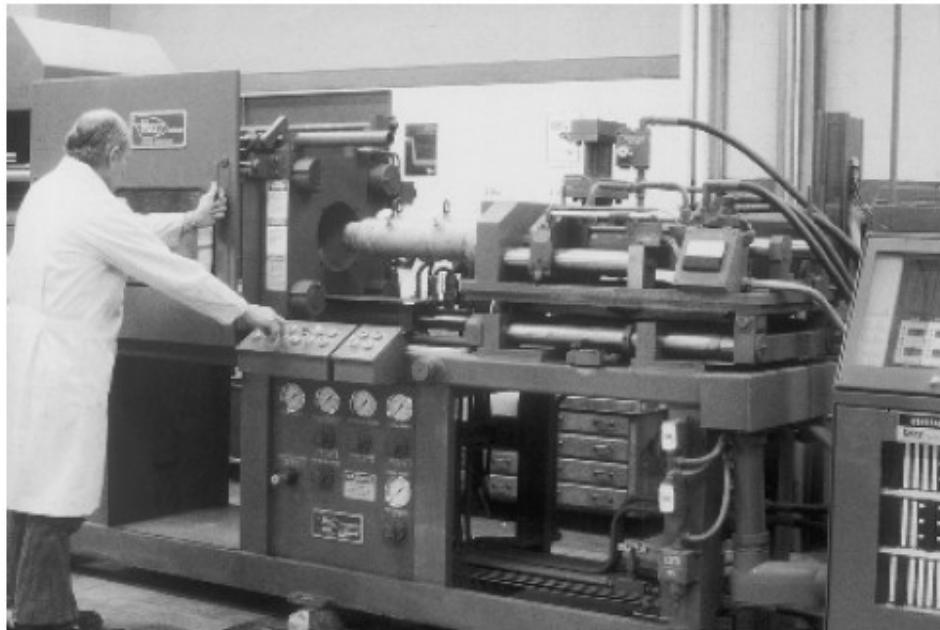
Injection molding press for molding thermoset plastics.
